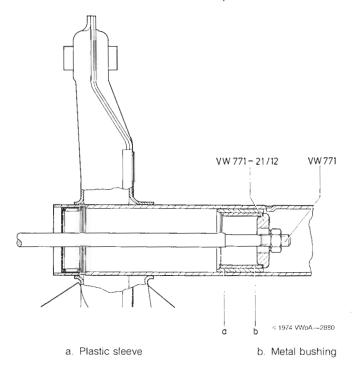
Toggle washer in position to pull out metal bushing without removing plastic sleeve.
